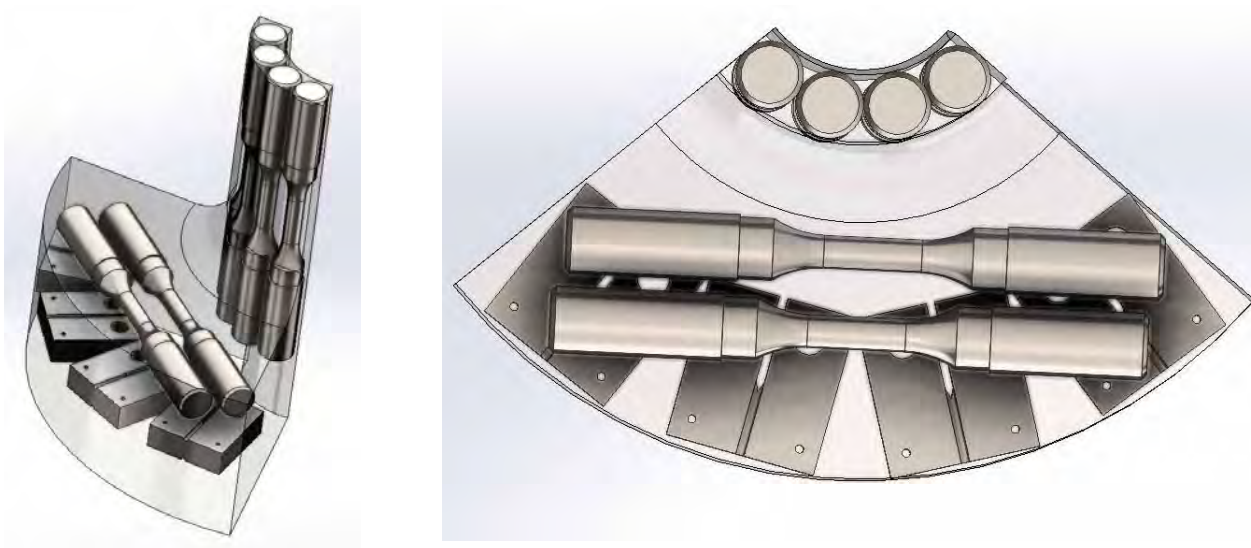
CGR/crack initiation and fatigue specimens were machined from the AM 316L flange produced by WEC and received from EPRI.
